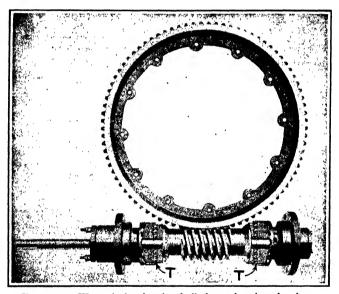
Wormshaft, showing ball thrust bearings in place.
